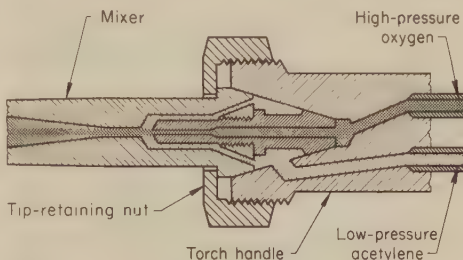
An injector mixing chamber for a gas welding torch (section taken through joint between welding tip and torch handle)
